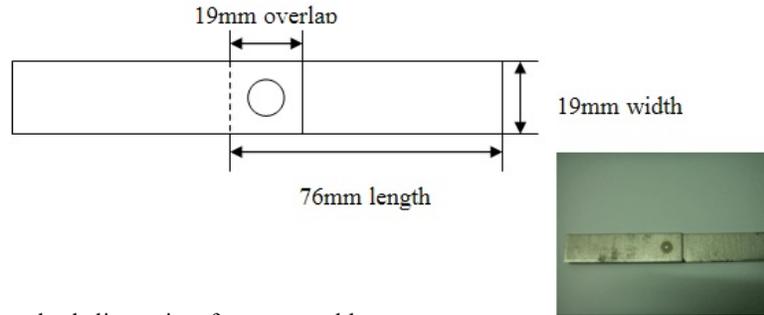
ANSI/AWS standard dimension for spot weld test.
